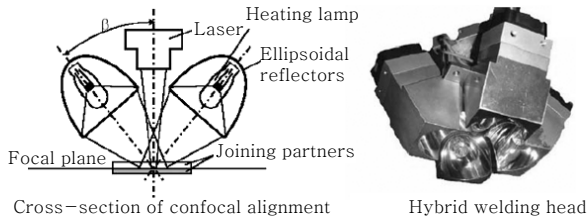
Hybrid welding<sup>12)</sup>
